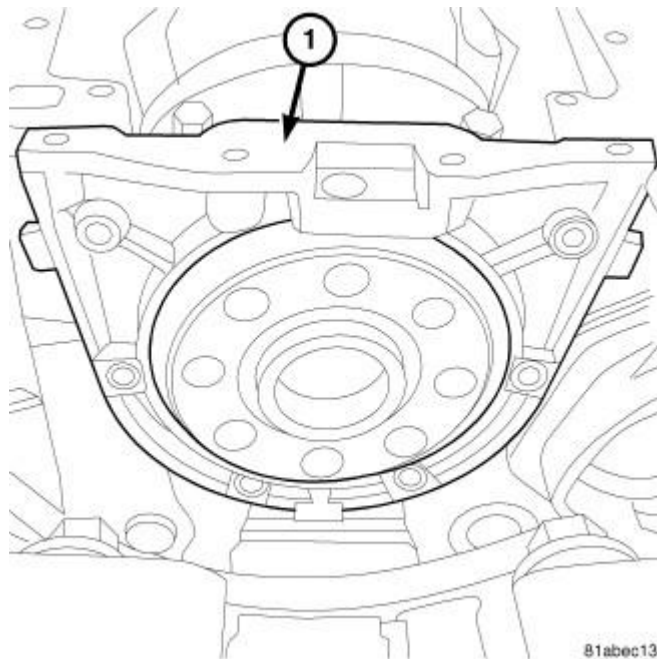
Rear Crankshaft Seal & Rear Main Oil Seal Carrier
